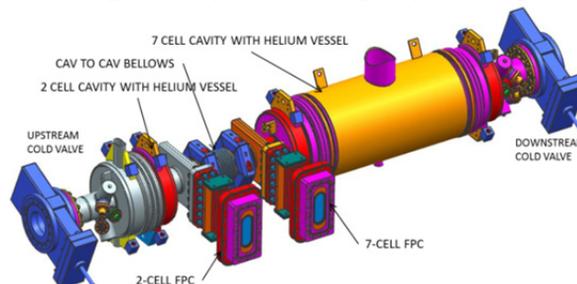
String assembly design of injector cryomodule electrons beam runs from 2-cell to 7cell cavity.
